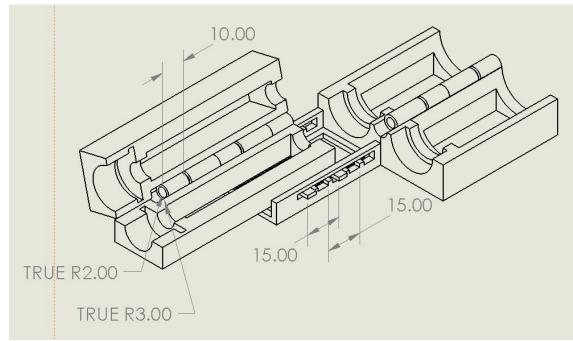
Depicted above is another drawing of the Drawer design. Again, all dimensions are in millimeters.
